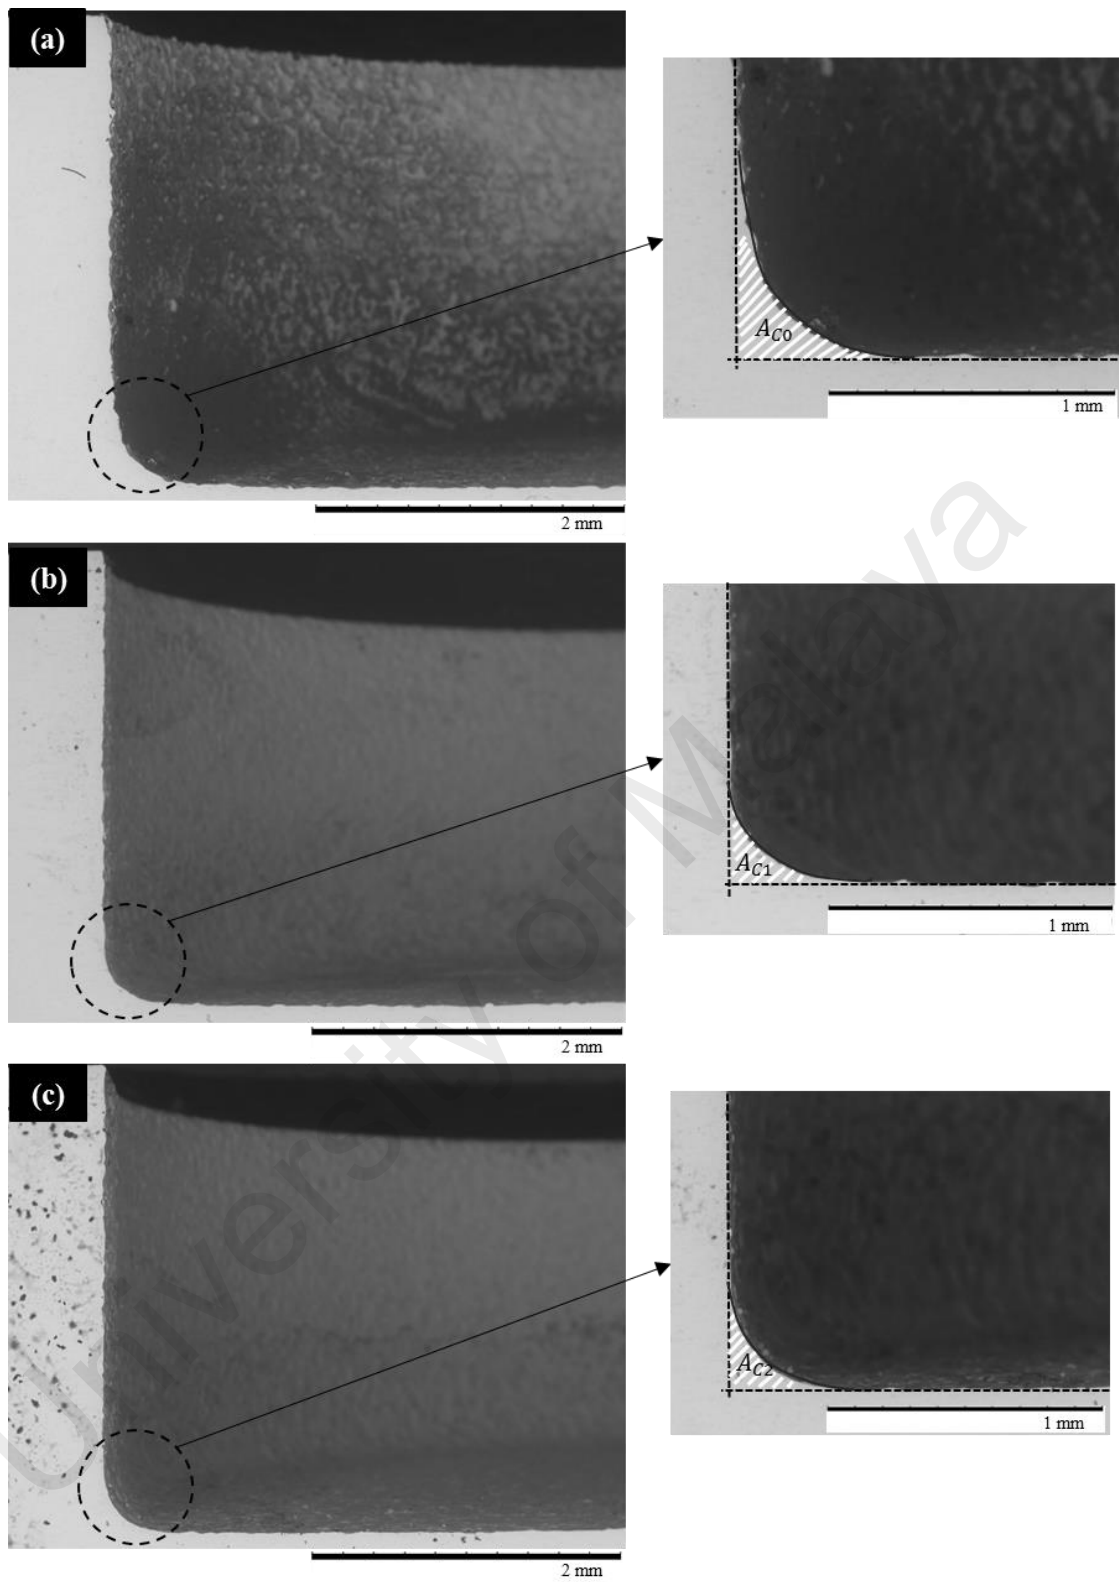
Cross-sectional view of cavity corner machined by electrodes (a) C0, (b) C1 and (c) C2
